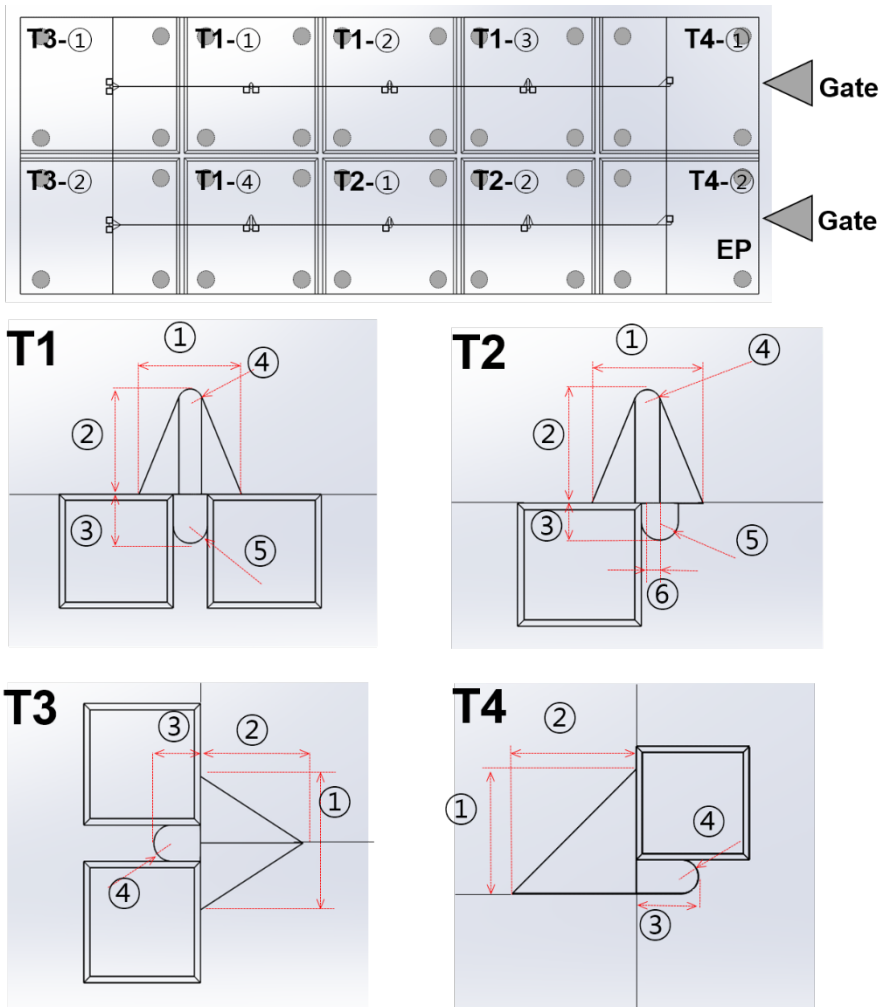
Drawing of mold core. A total of five blocks are assembled to complete the core, which is designed in 10 different designs. EP indicates eject pin position.
